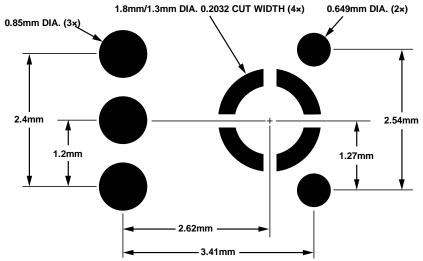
Suggested Solder Paste Stencil Pattern Layout
